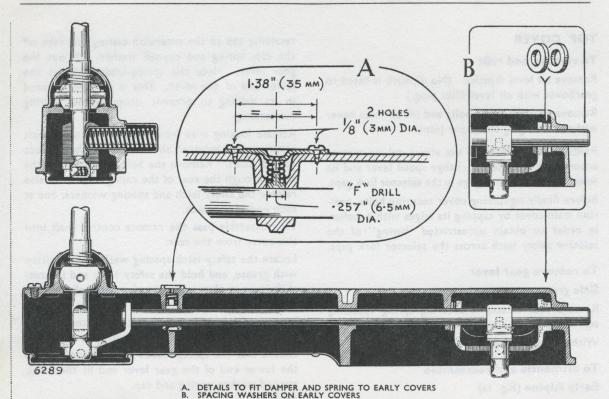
Sectional view of top cover Rapier and late Alpine
